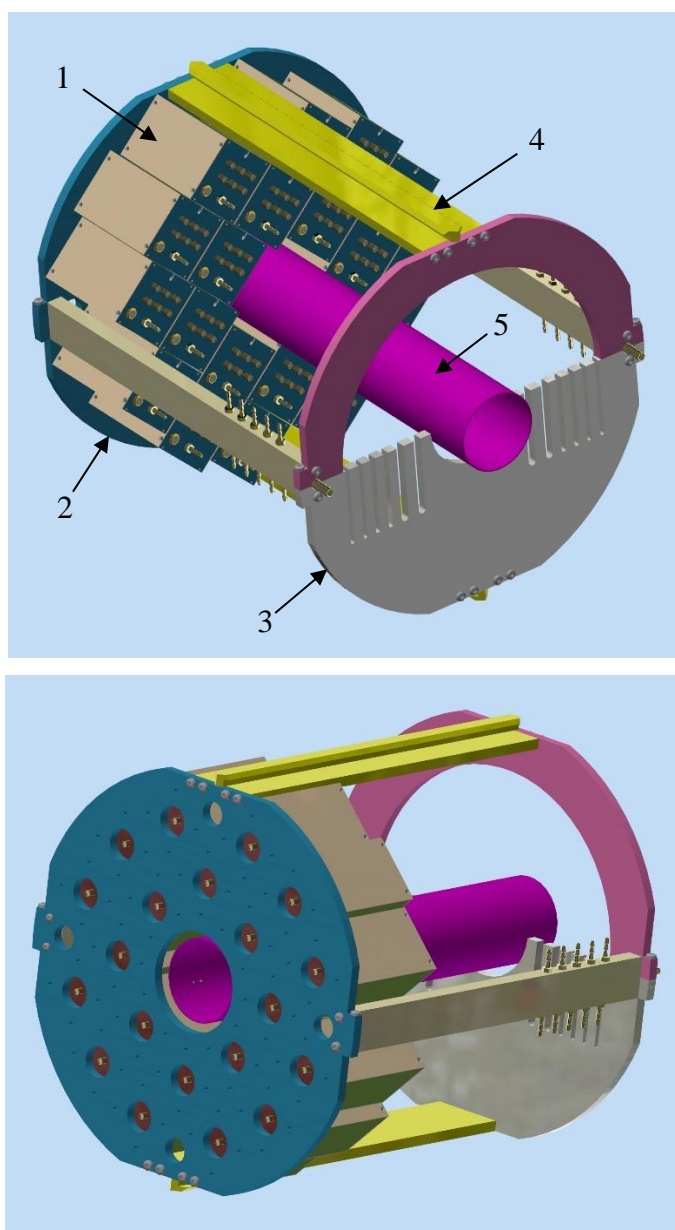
A view of assembly of FFD sub-detector: 1 – the modules, 2 – the mechanical support of FFD modules, 3 – the mechanical support of cables, 4 – the support of sub-detector assembly, 5 – the beam pipe.
